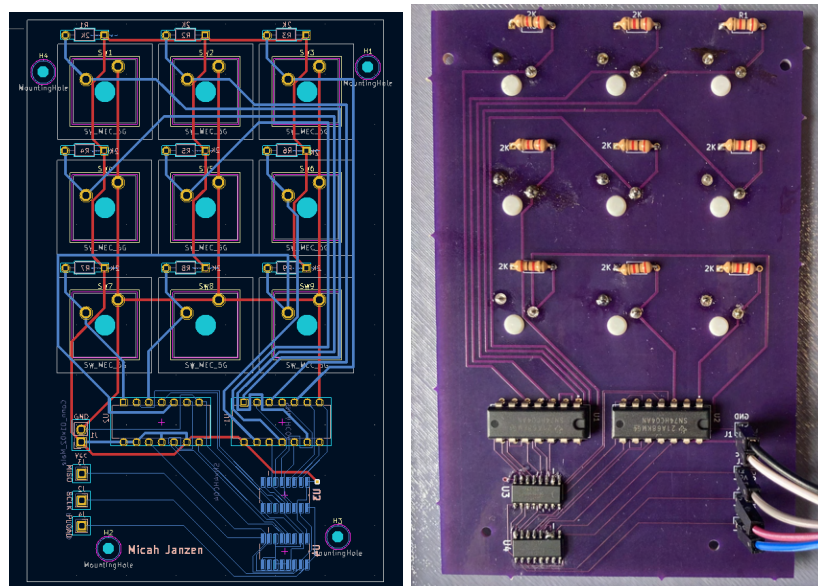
Student Designed PCB Schematic and Final PCB
